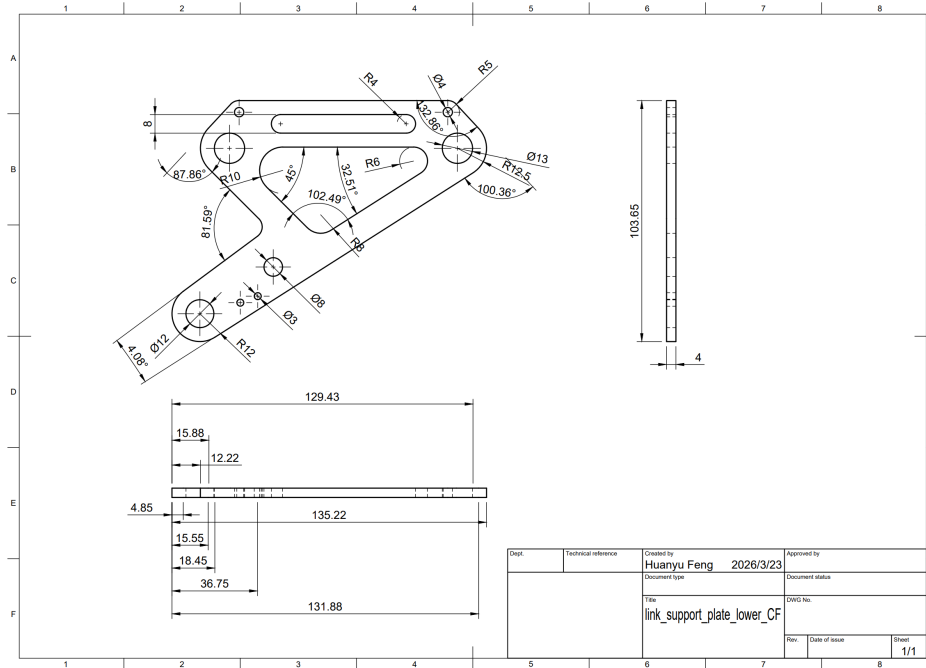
Engineering drawing of the lower carbon-fiber link support plate.
